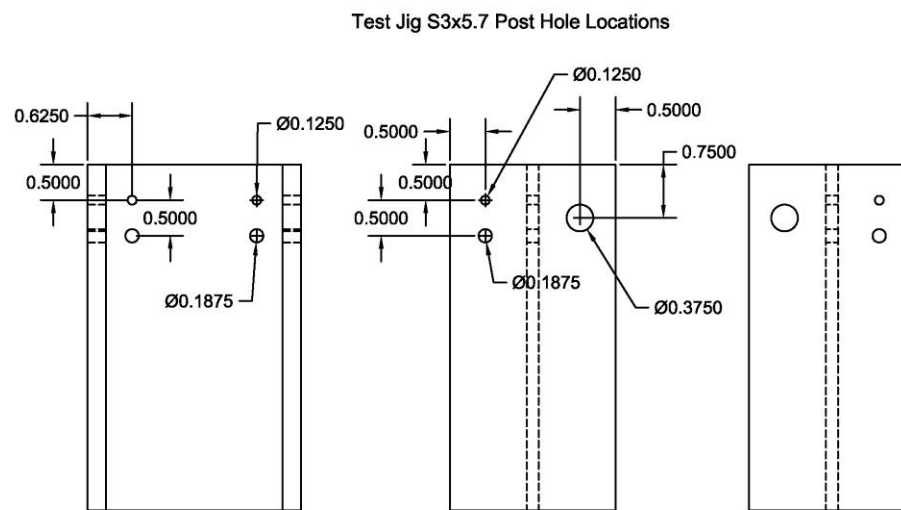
S3x5.7 (S76x8.5) Section Hole Details
